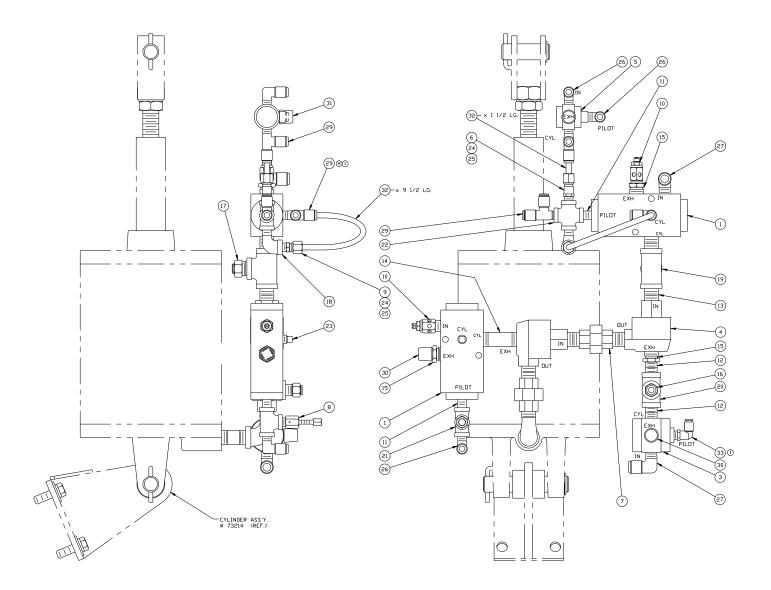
74597 (Rev. A) Cylinder Circuit Assembly Button Close, Lever Lock For drawing refer to next page.
